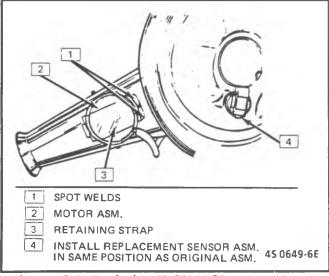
Replacing THERMAC Vacuum Motor S/T Series
